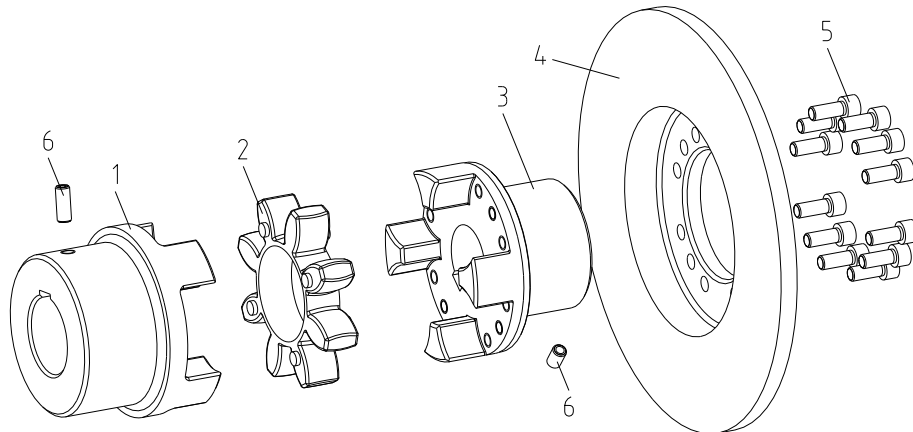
ROTEX®, type SBAN with cranked brake disk
